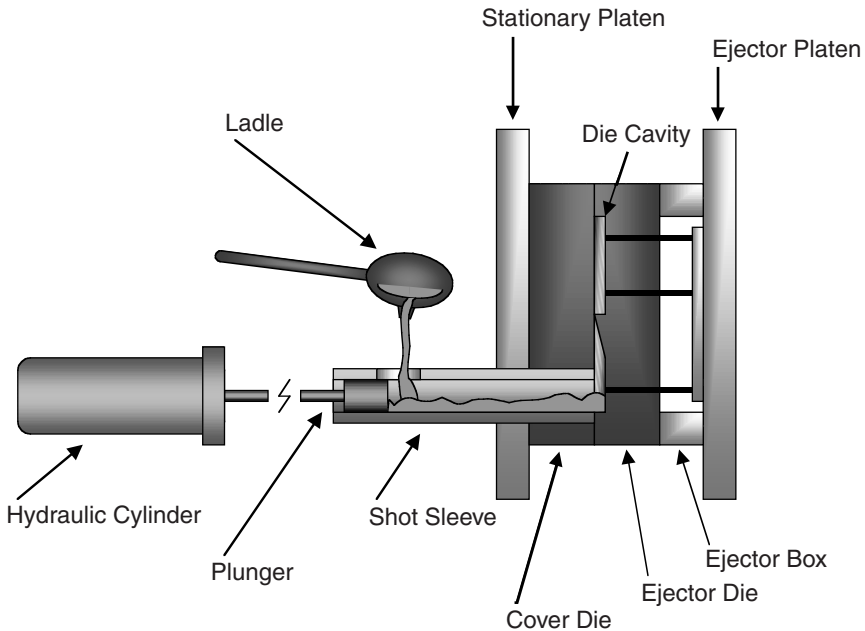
Graphical illustration of a cold-chamber die casting machine.
